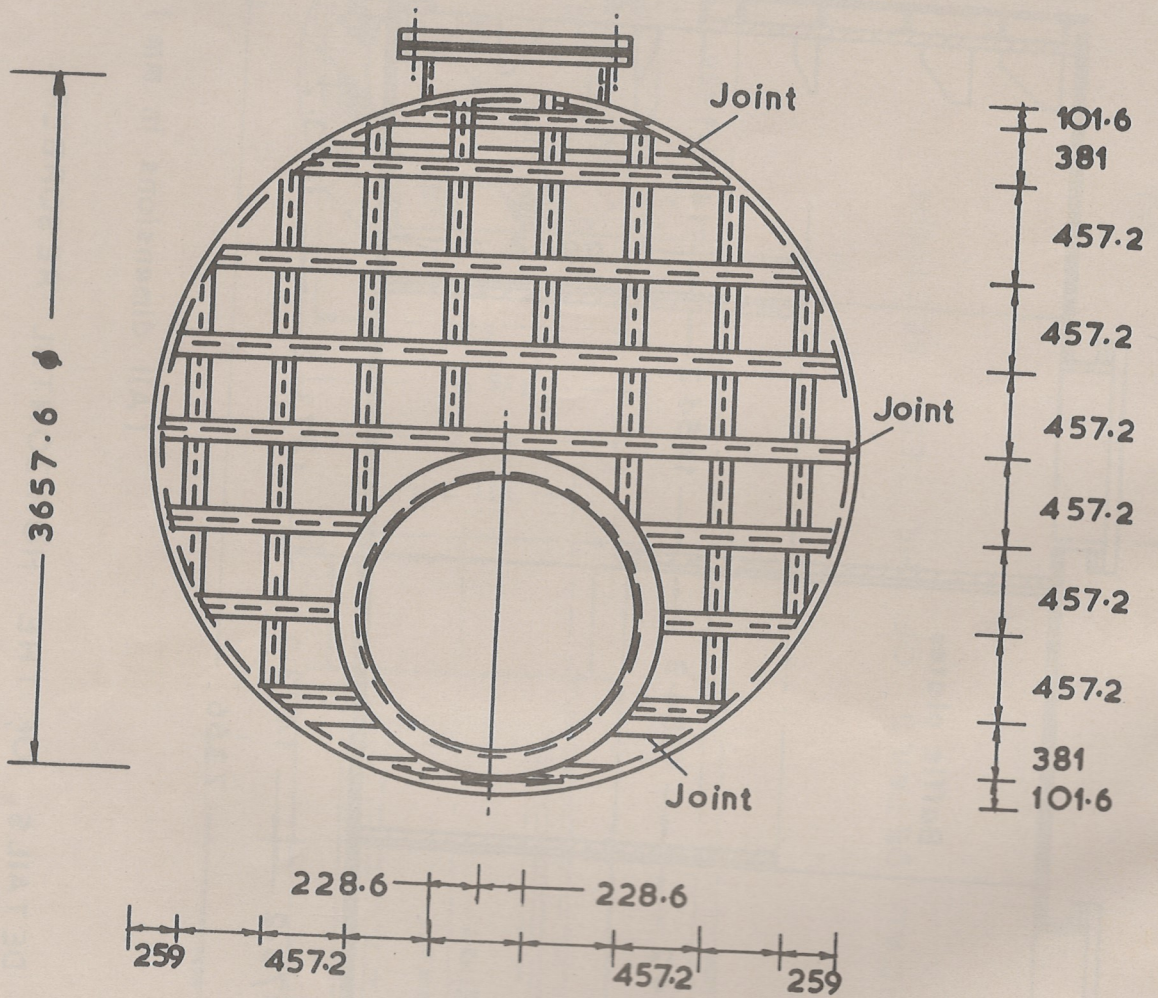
CERTAIN GEOMETRICAL DETAILS OF THE TEST SECTION.
